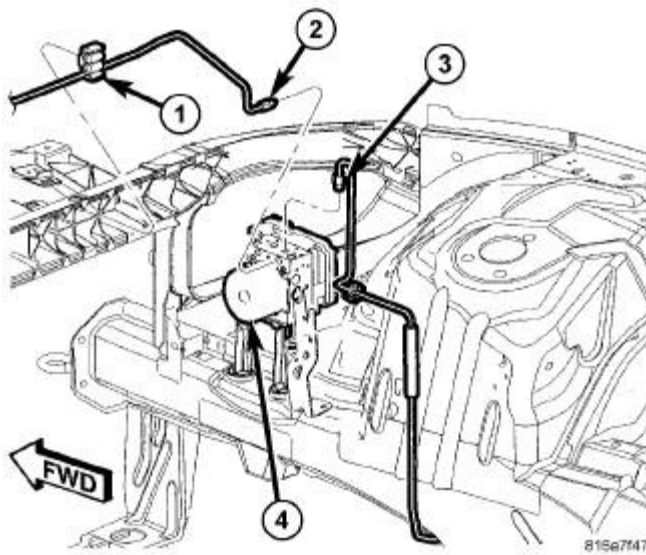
LEFT FRONT AND RIGHT FRONT BRAKE TUBES AT ICU
